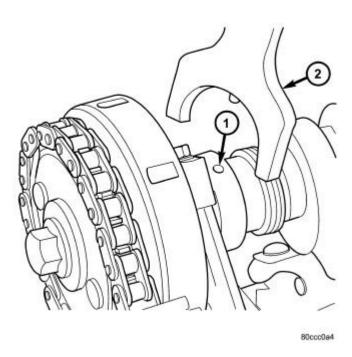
Special Tool 8428 Courtesy of CHRYSLER LLC
